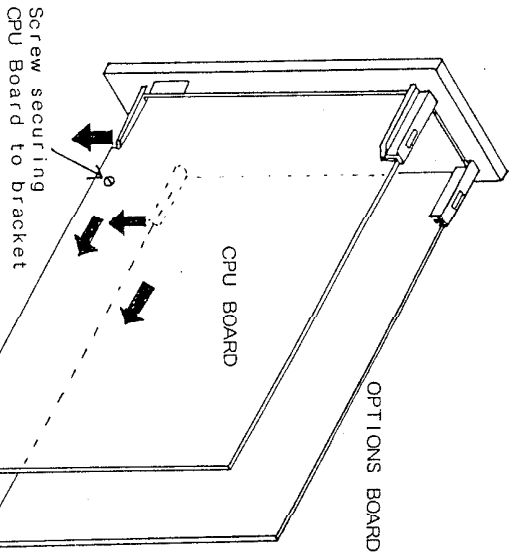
DETACHING THE PCBs FROM THE FRONT PANEL
